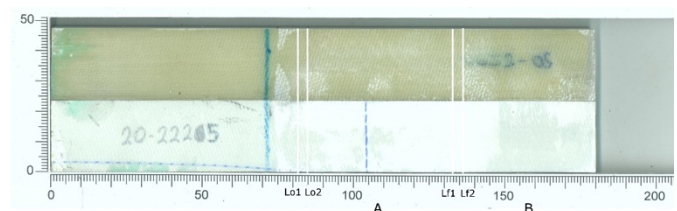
Example of a fracture surface after testing with a D-AM PC/PC DCB specimen (specimen number 20-2225).
